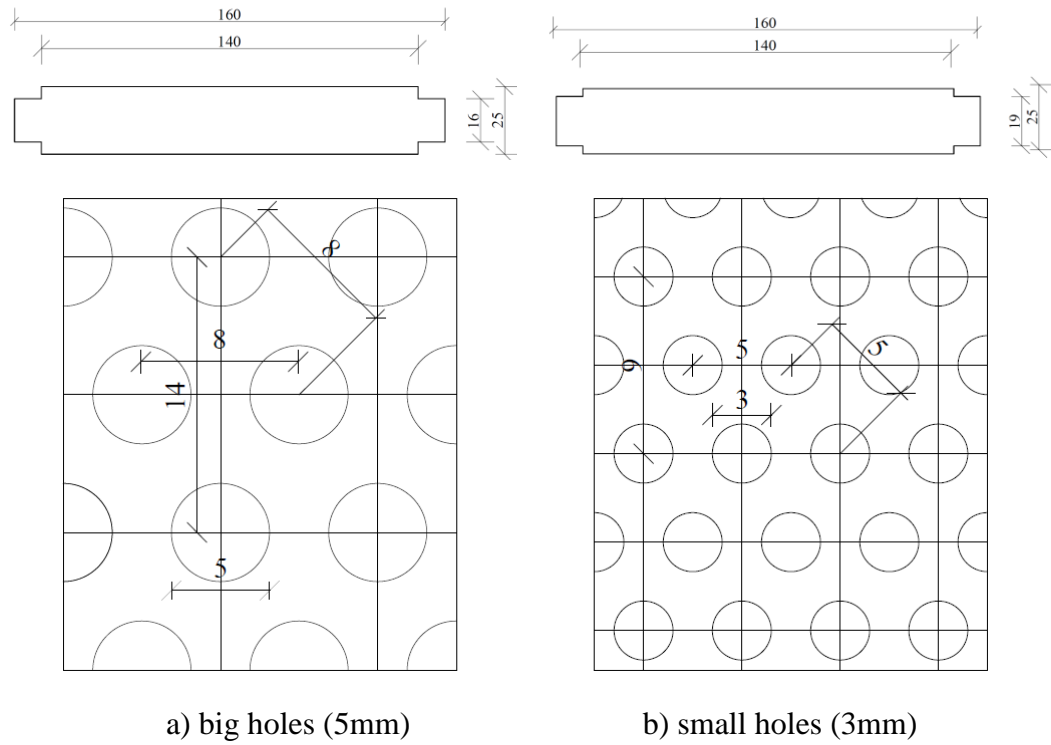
Plans and dimensions of perforated plates (in mm)
